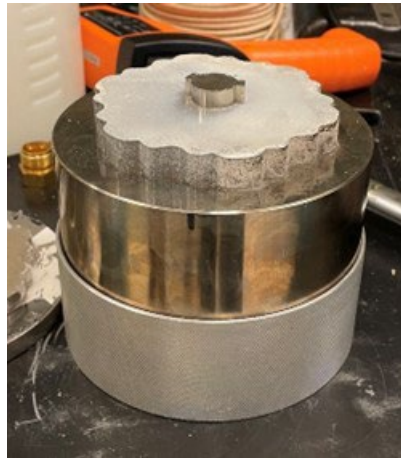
DHAM rotor assembly during removal from custom hot pressing die.
